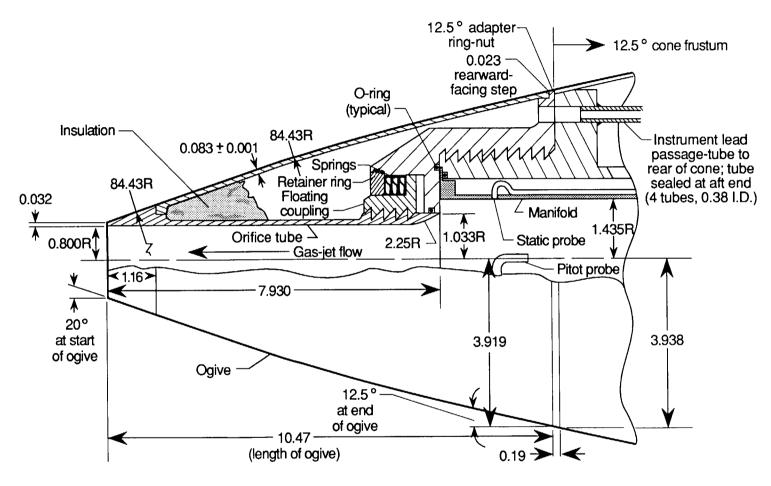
Schematic drawing of gas-jet nose. Linear dimensions are in inches.
